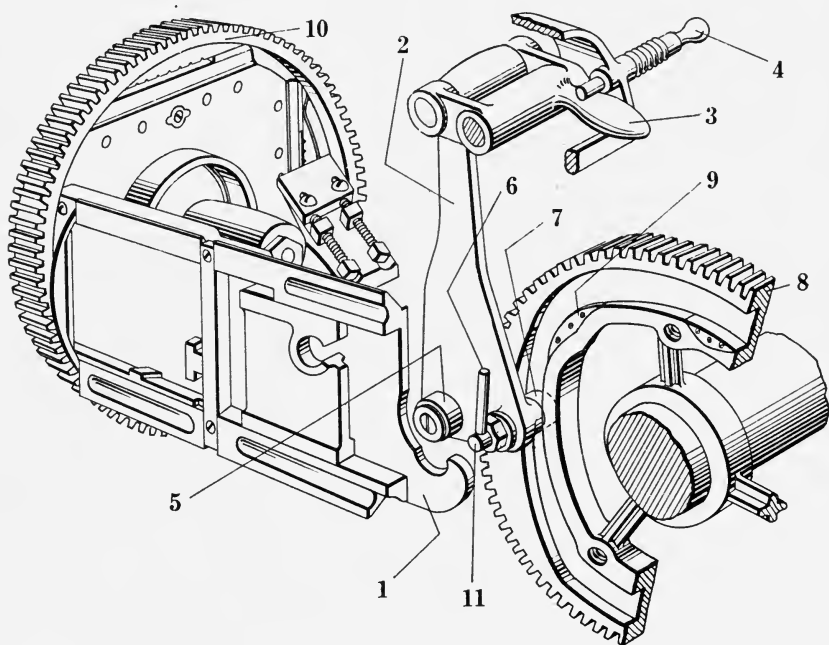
Disconnecting the Mold Slide. View showing how the mold slide 1 is disconnected from the mold cam lever 2, so the slide may be withdrawn for cleaning or repair purposes. The handle 3 is depressed and the handle pin 4 withdrawn. After the handle 3 is depressed the pin 4 holds the lever 2 up so that roller 5 will not be in engagement with the hook in the casting of the mold slide 1. The mold slide cam 8 controls the forward and back strokes of slide 1 and disk 10, through the mold cam lever 2 connected by rollers 5 and 7. The distance the mold disk 10 can go forward against the vise jaws is controlled by the eccentric pin 11. The jam nut on the pin is loosened and the handle 6 shifted until the mold face is brought within .010" of the vise jaws, when the roller 7 is in contact with the first shoe 9 in cam 8.
